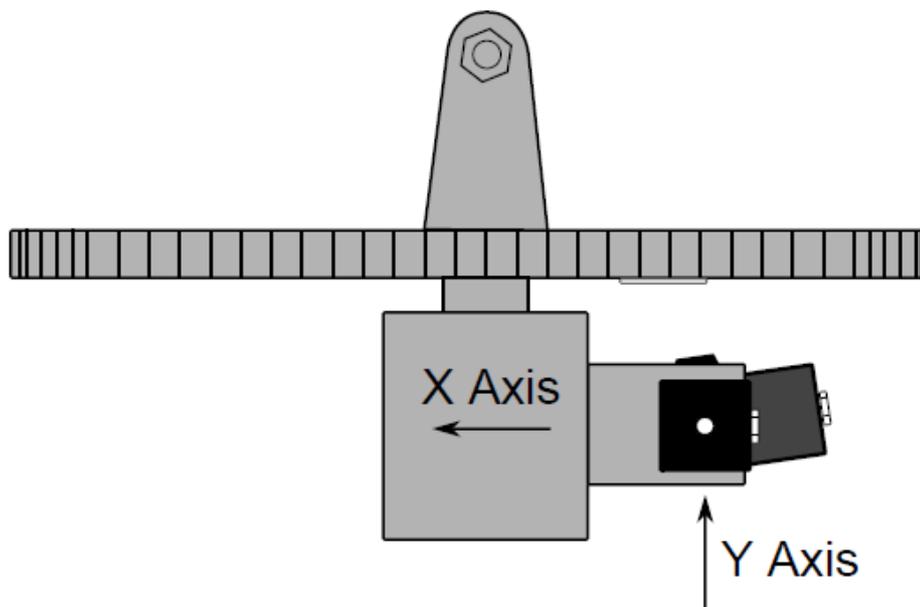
Front View of Sensors Mounted on Rotor Head
